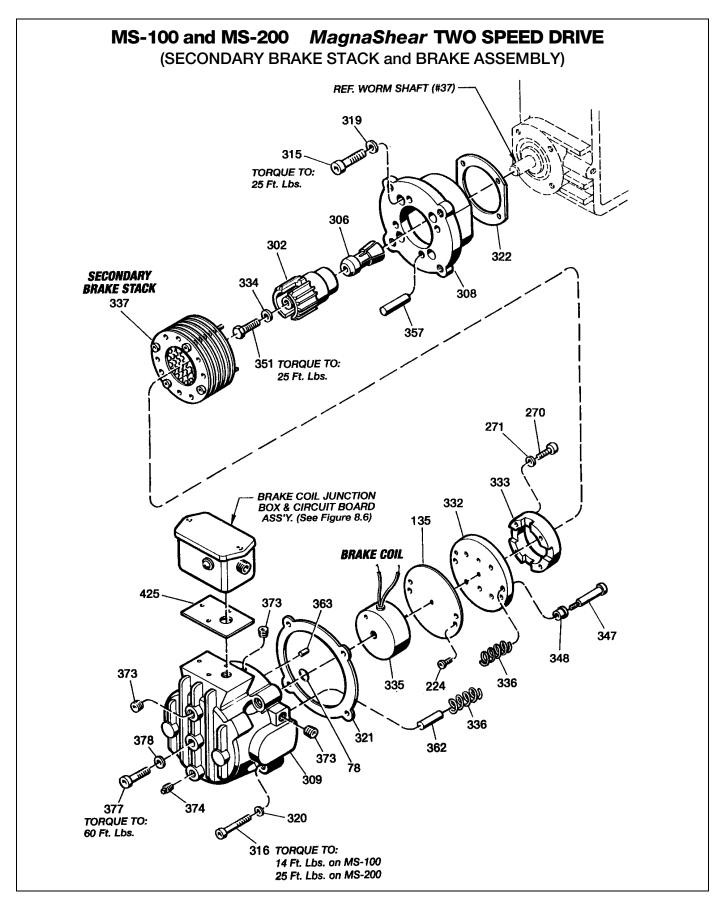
Repair Parts - Secondary Brake Stack and Brake Assembly
